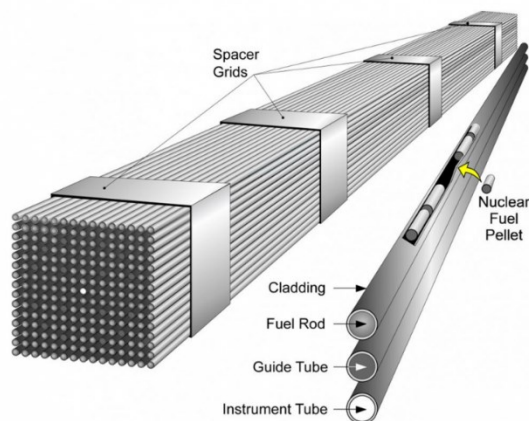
Schematic of PWR fuel assembly and fuel rods.
